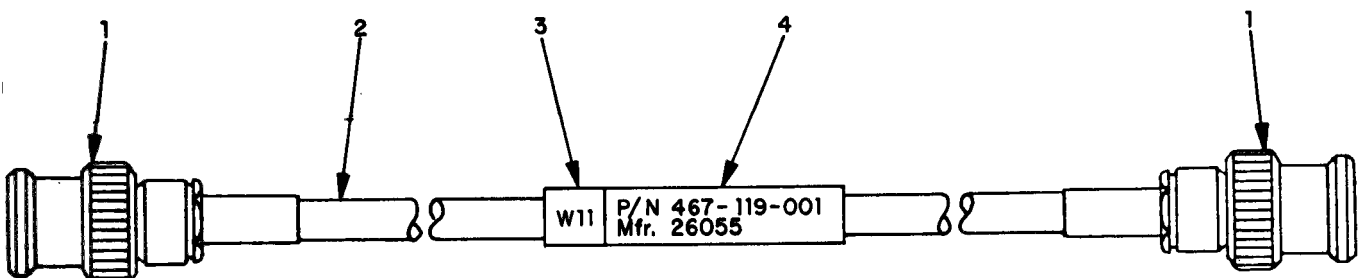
Adapter cable assembly W11, part number 467-119-001
